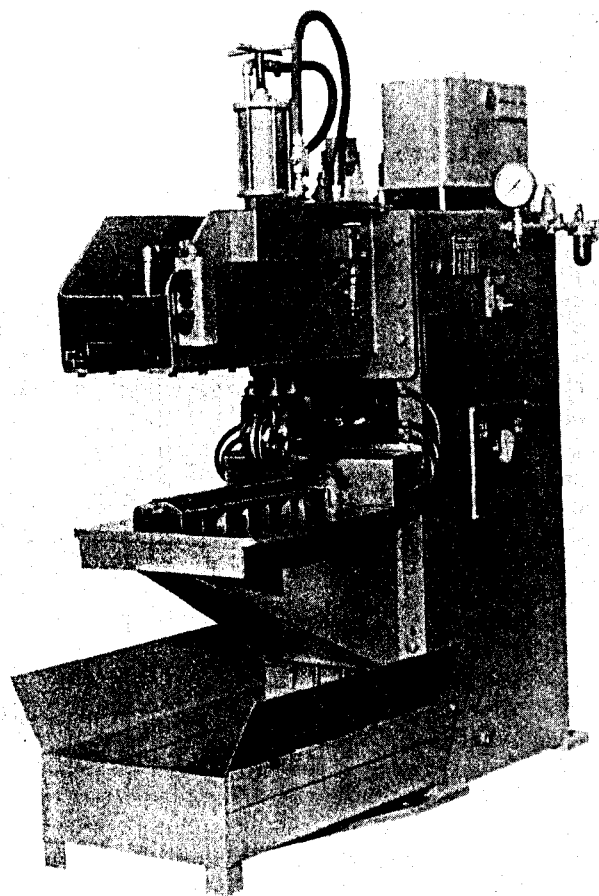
Traveling Electrode Seam Welding Machine
